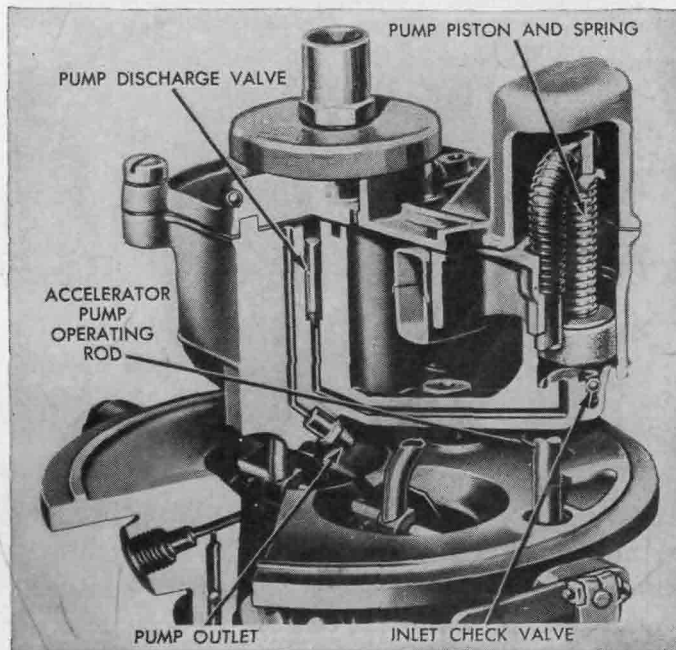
Accelerating system of carburetor. (Ford Motor Company)
